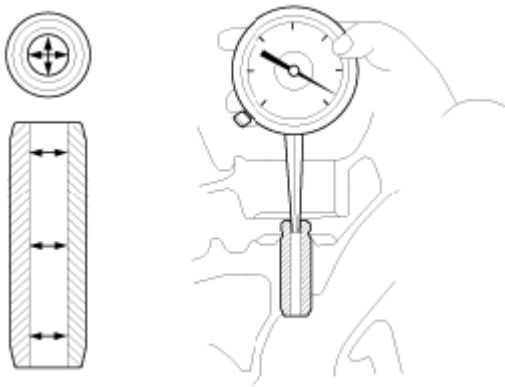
Measuring Inside Diameter Of Valve Guide Using Caliper Gauge
